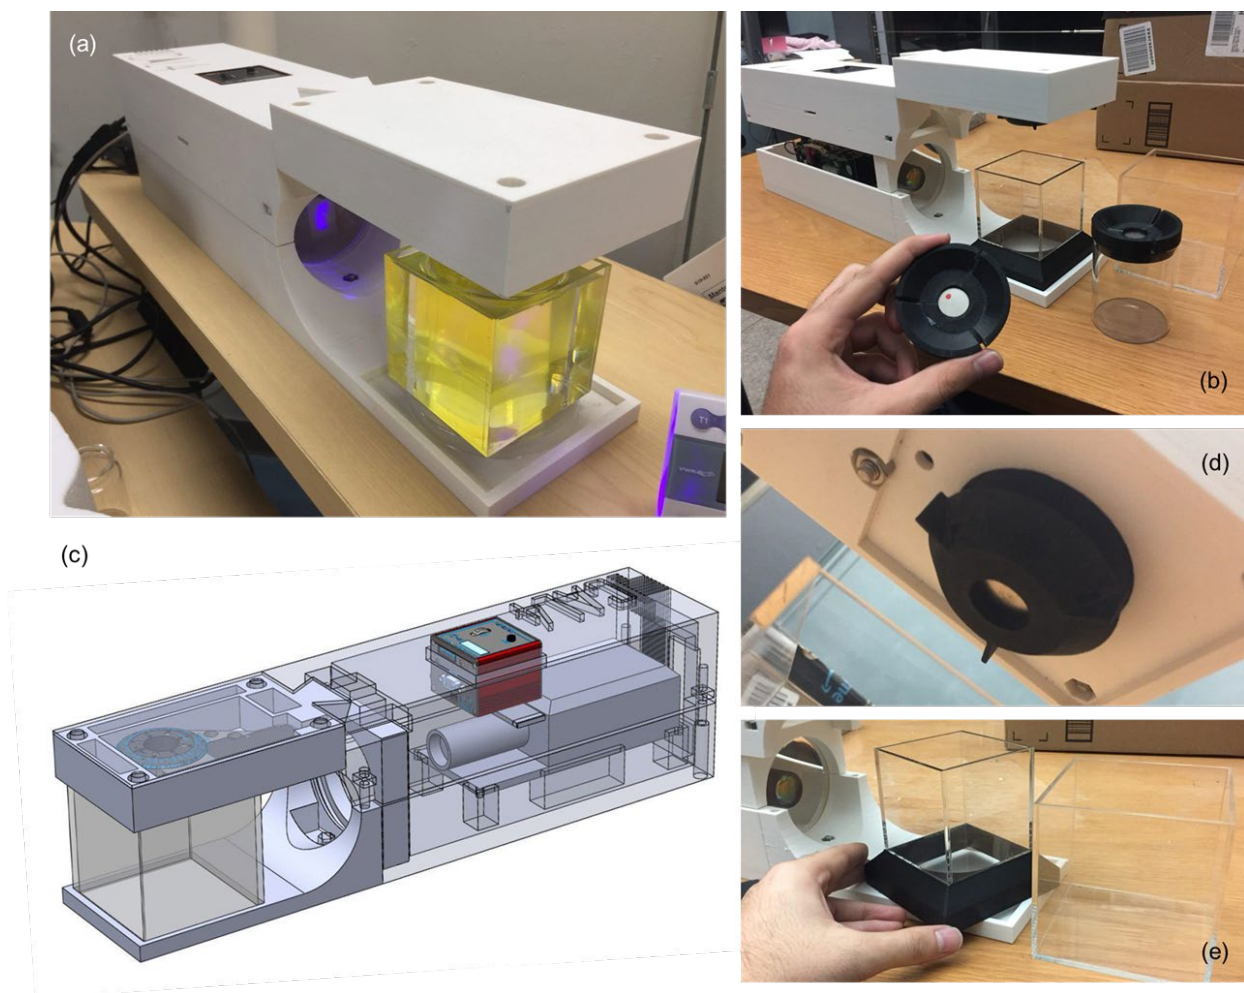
The six-inch printer setup and its various mechanical and optical components.
